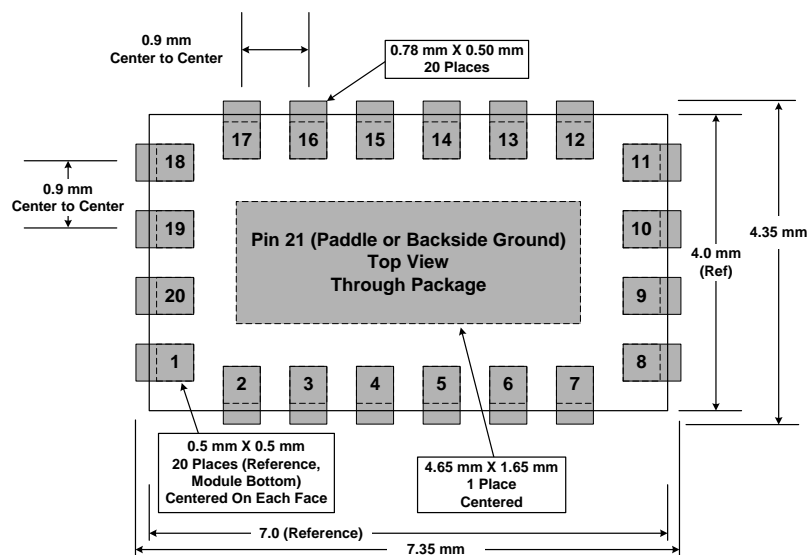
7x4mm Module Package Drawing for Footprint Design
